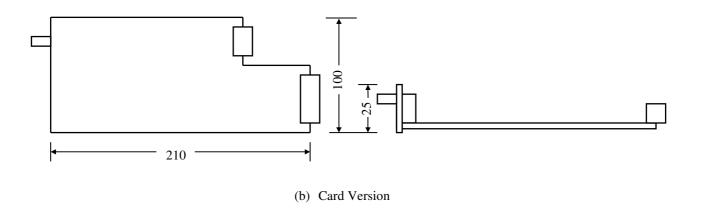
OSD8815 MOUNTING DIMENSIONS
